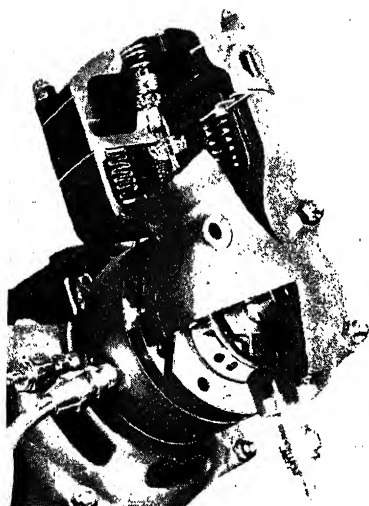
Section through oil shutoff valve and metering pump. (Courtesy of Williams Oil-O-Matic Heating Corporation.)
